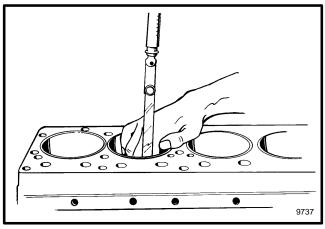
CHECK THE CLEARANCE BETWEEN THE PISTON AND THE CYLINDER LINER
